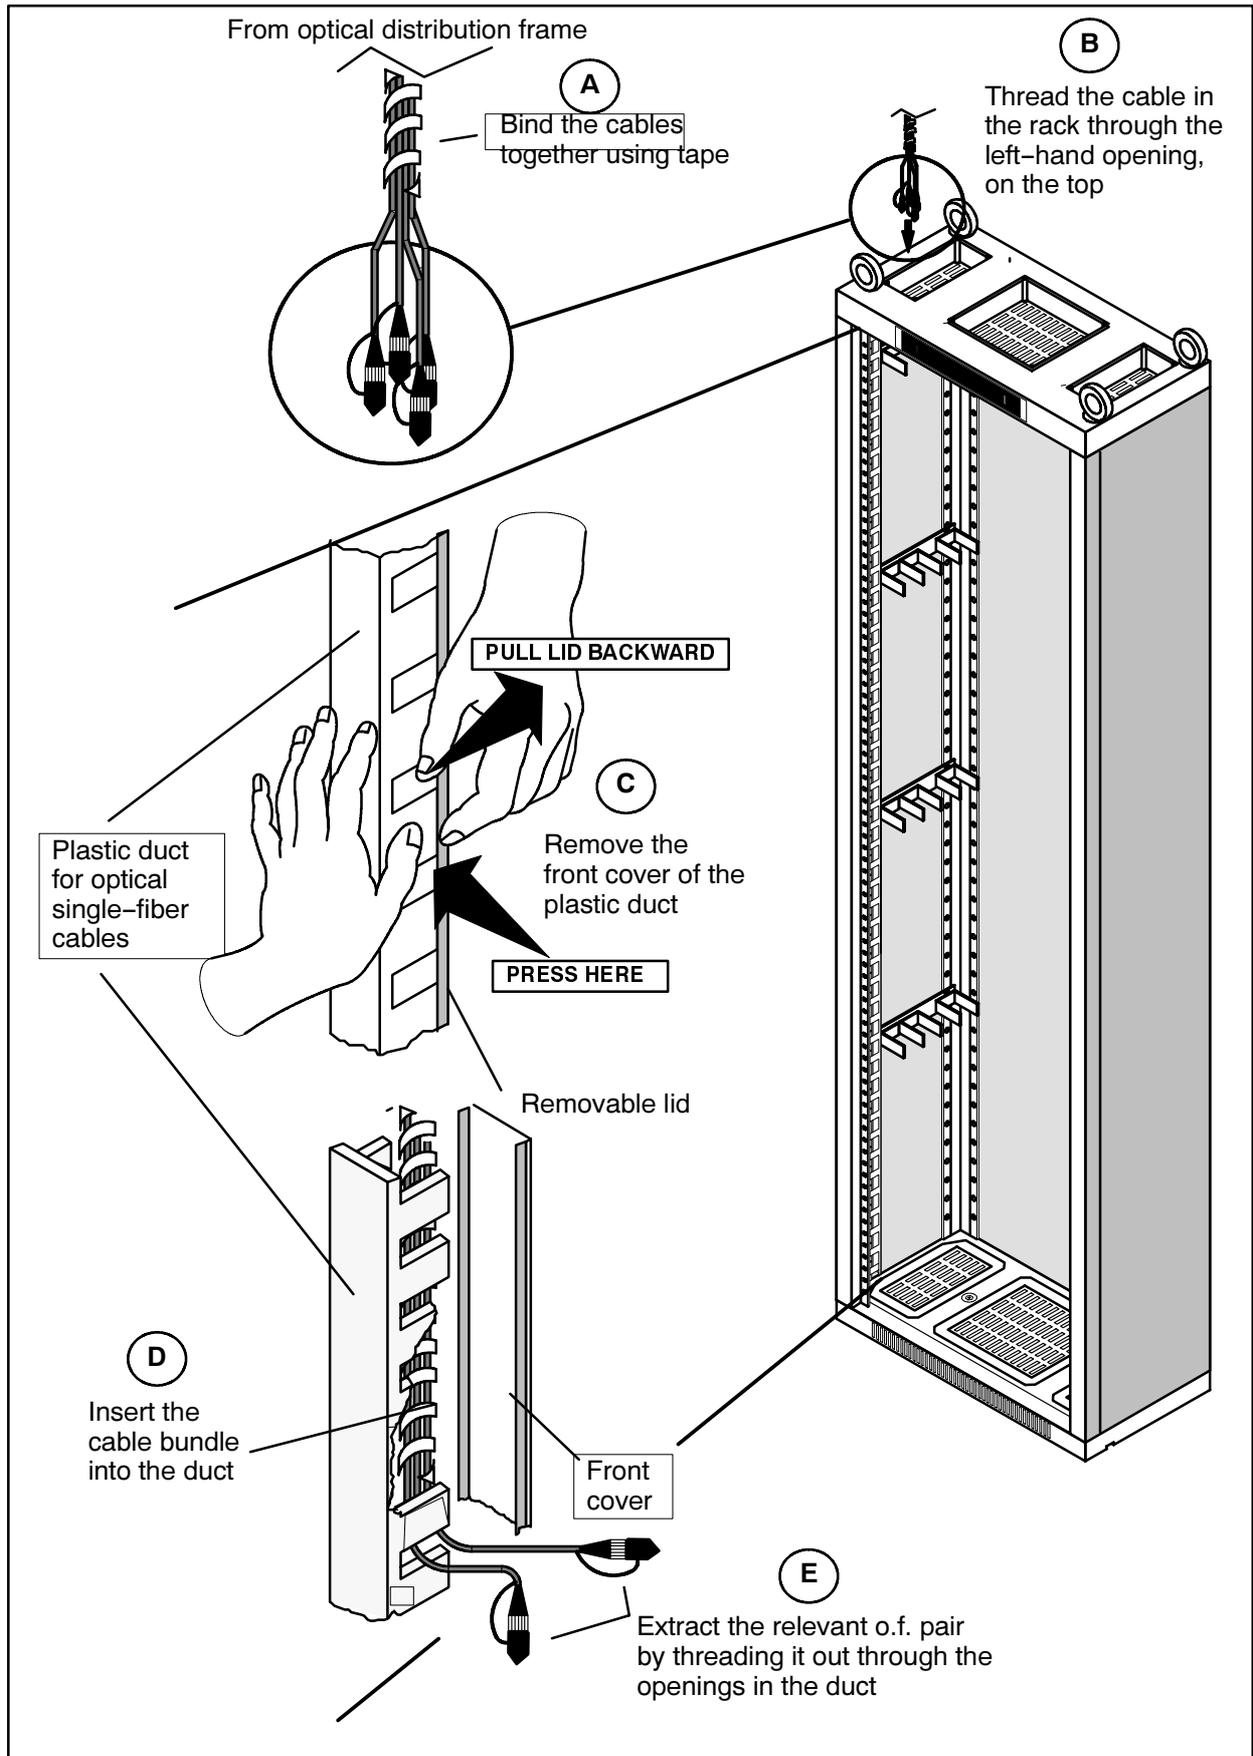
Installation of optical single-fiber cables – entry through top opening
